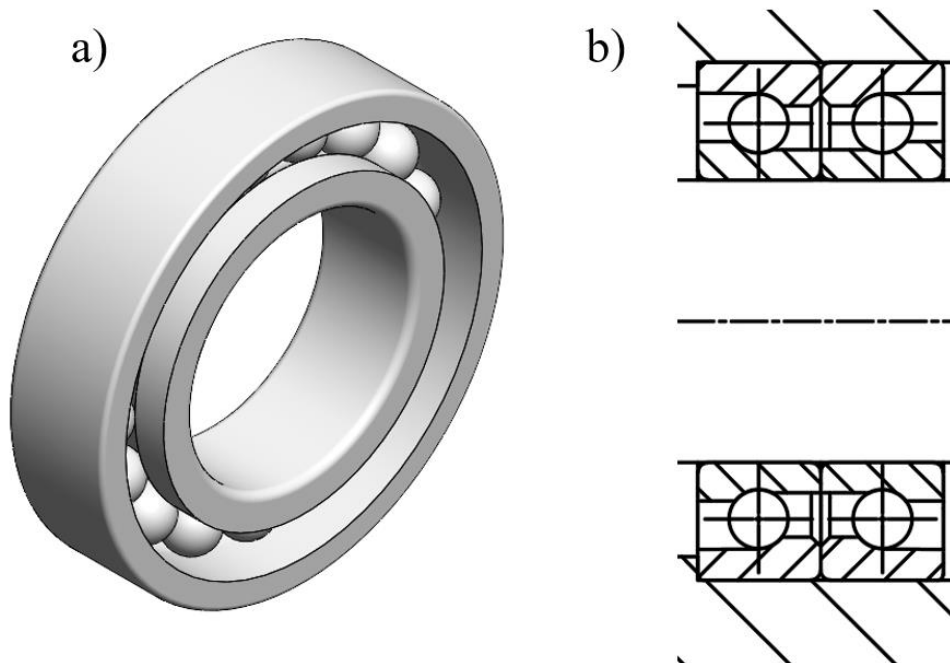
(a) CAD model of the ball bearing and (b) The ball bearings are arranged back-to-back.
